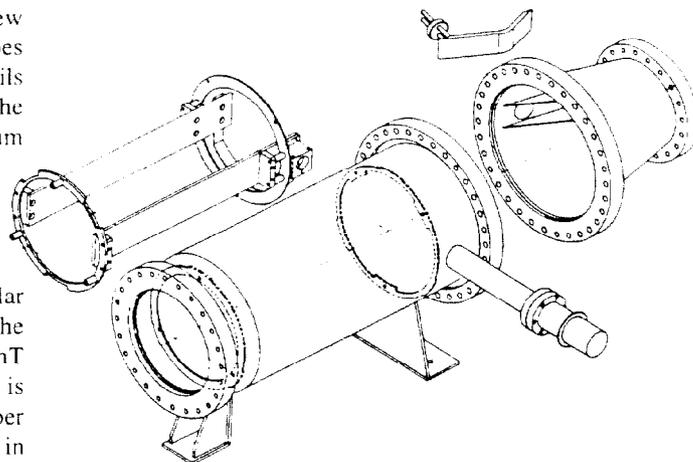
Exploded view of Kicker and its Vacuum vessel.
